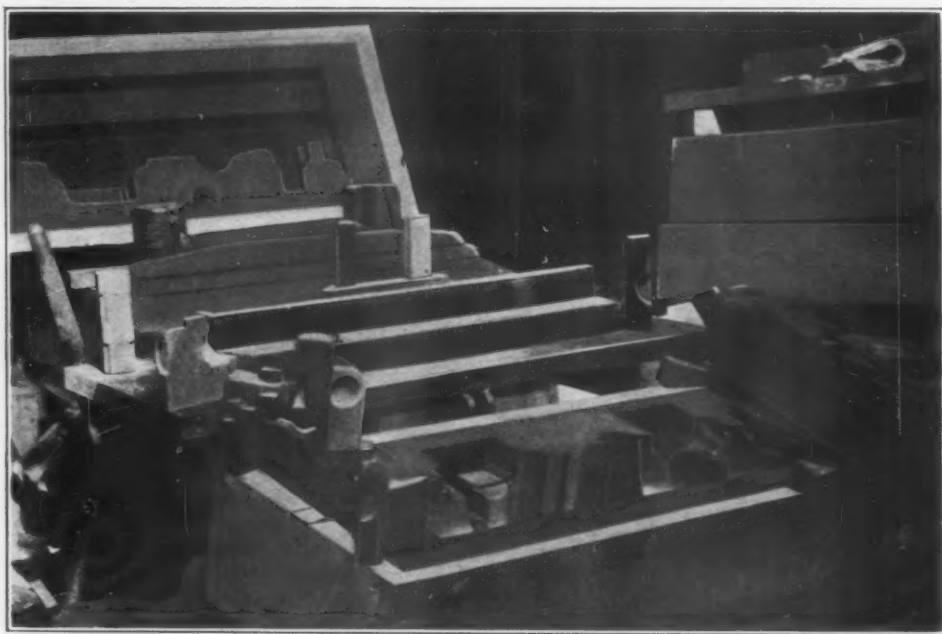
Molding the Saddle for a No. 2 Milling Machine.
